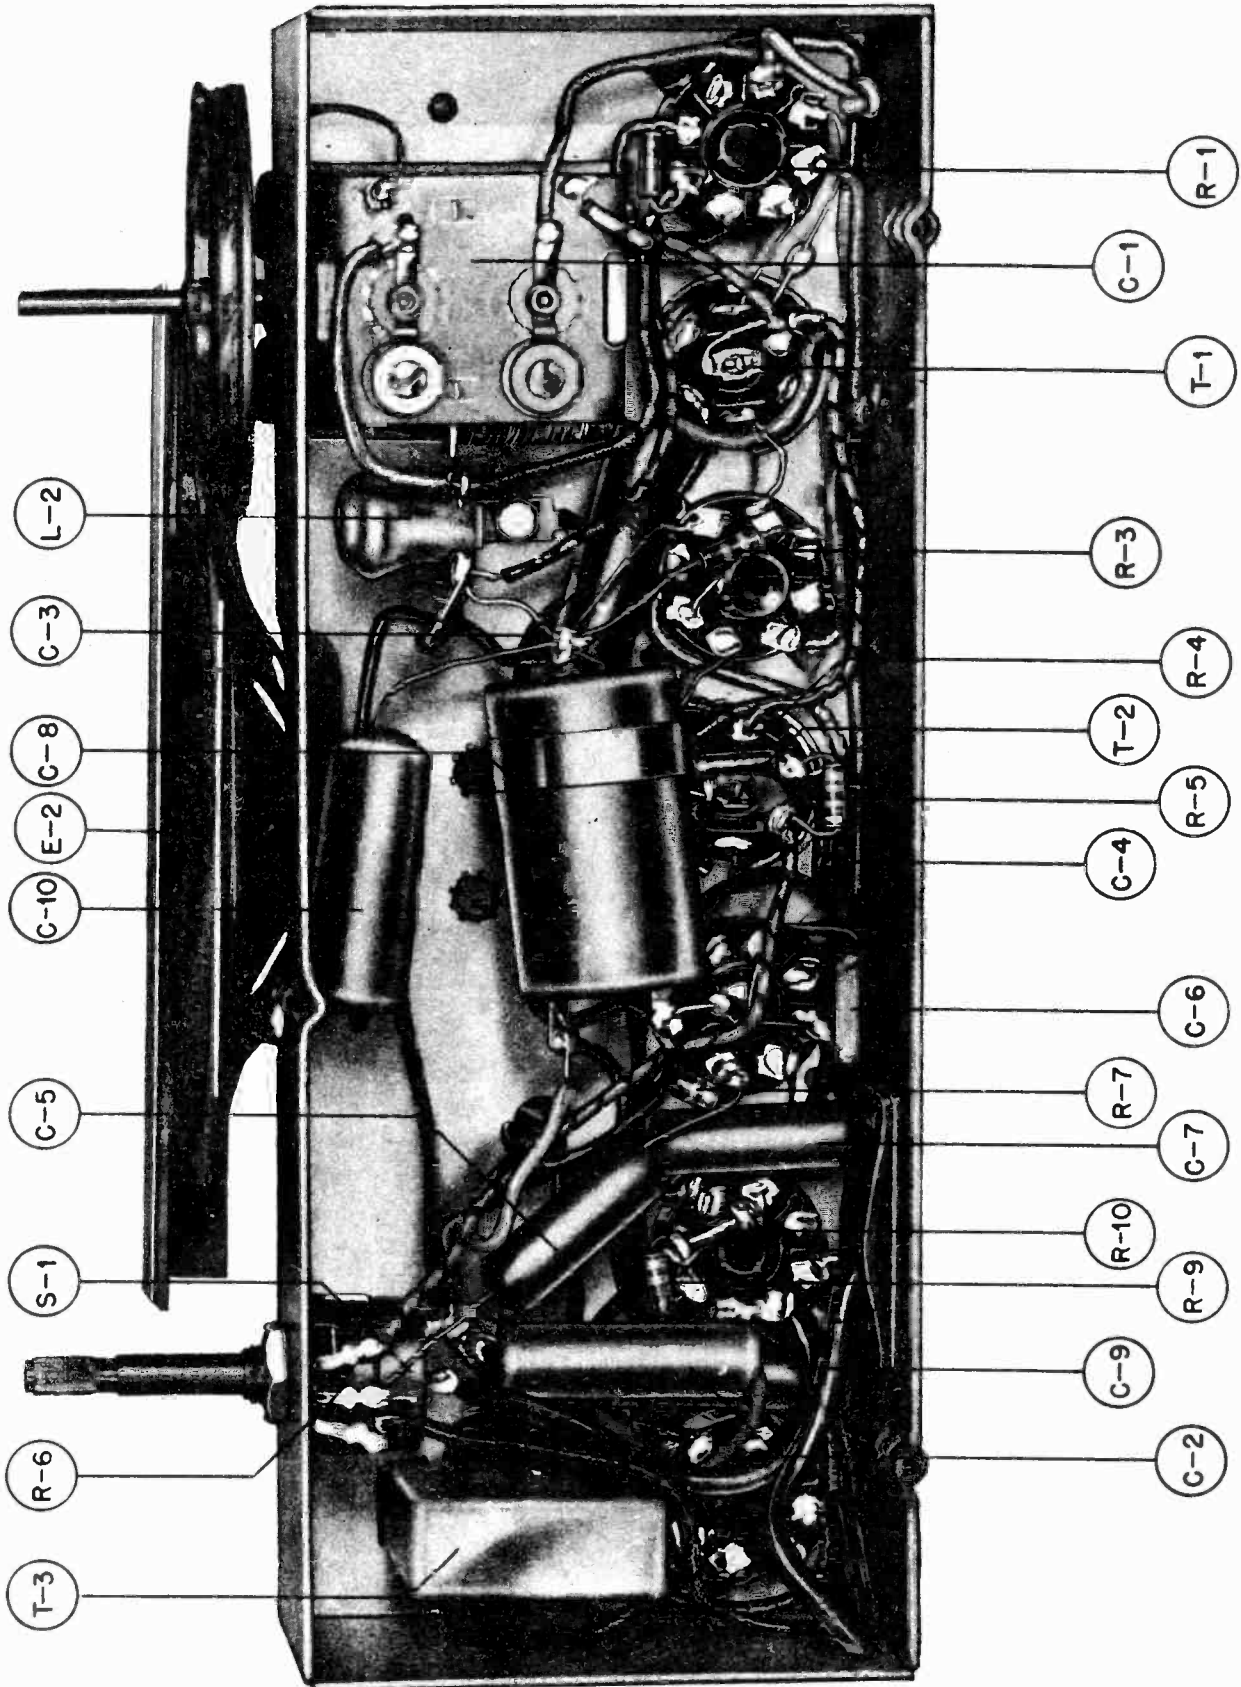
BOTTOM VIEW (CHASSIS HS-1)
